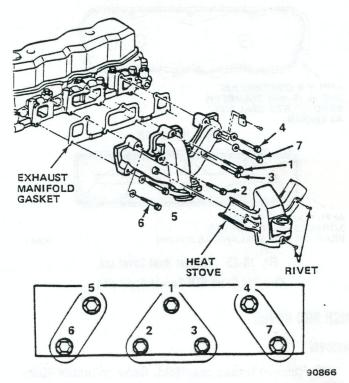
B-24 Exhaust Manifold Tightening Sequence
